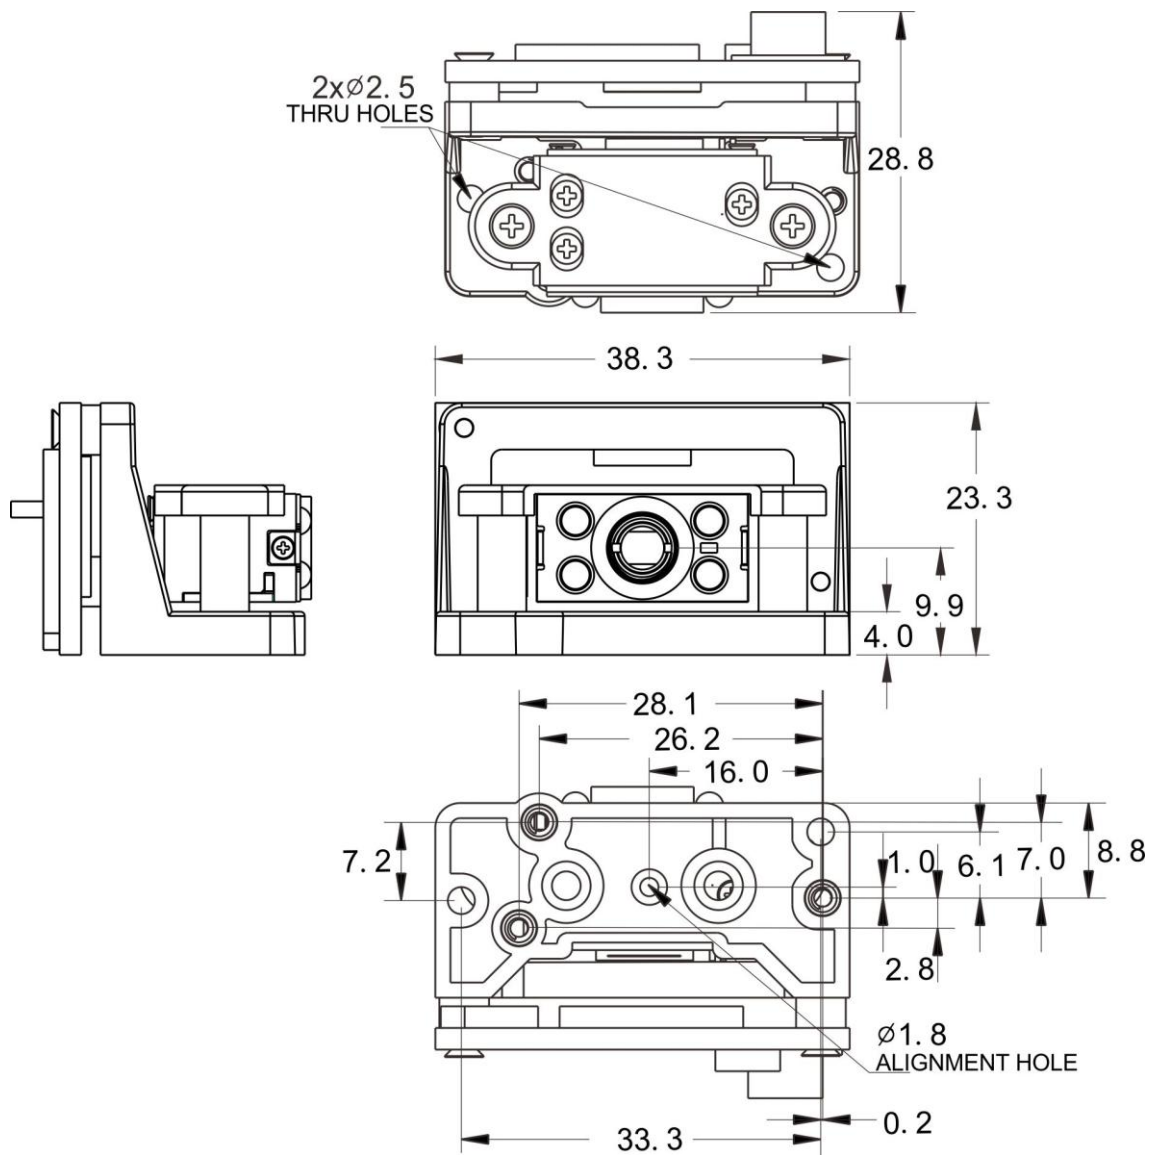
Dimensions of type-I bracketed Image Engine (Units = mm)
